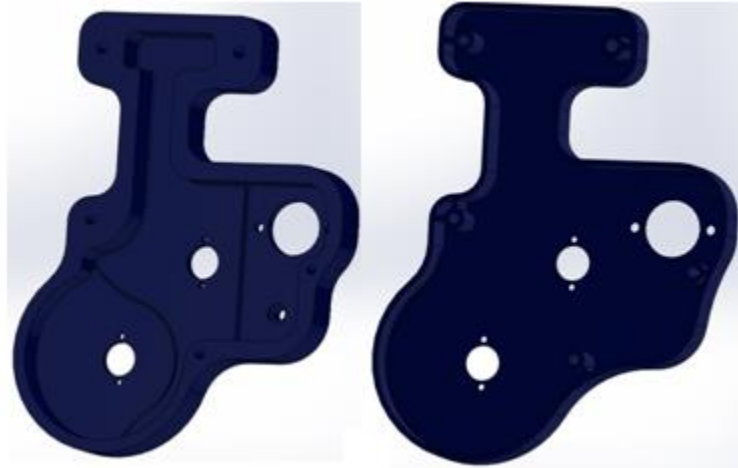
Comparison between designs for 3D printing (left) and injection molding (right)
